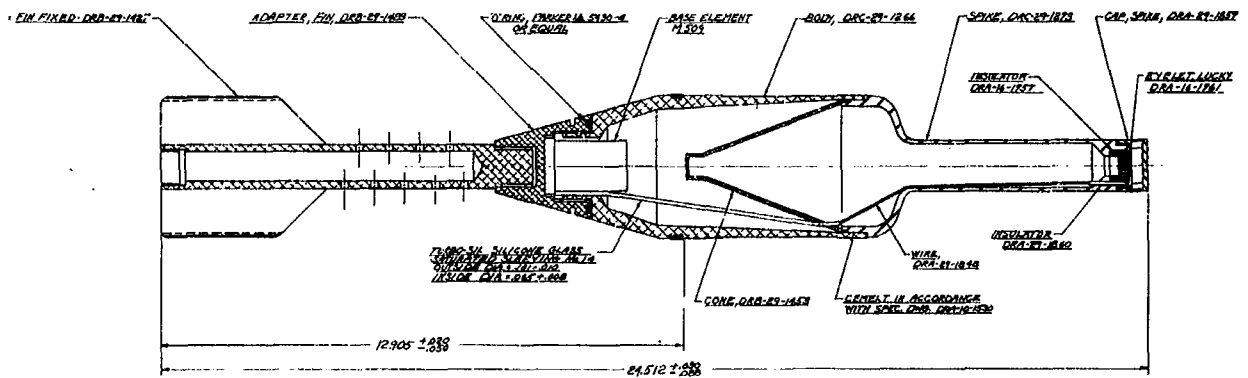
Metal Parts Ass'y., T249E8 Mod. 2D.
